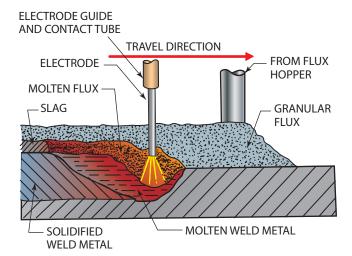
Submerged arc welding (SAW).
